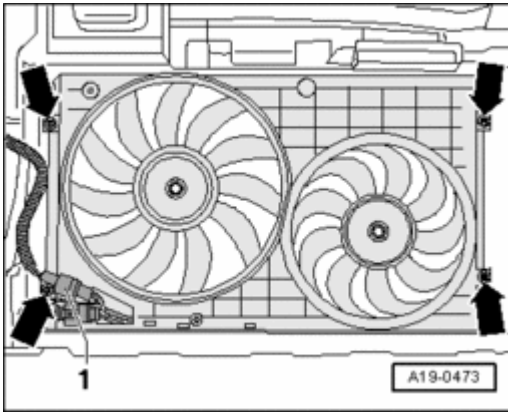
Identifying Harness Connector And Fan Mount Mounting Bolts
